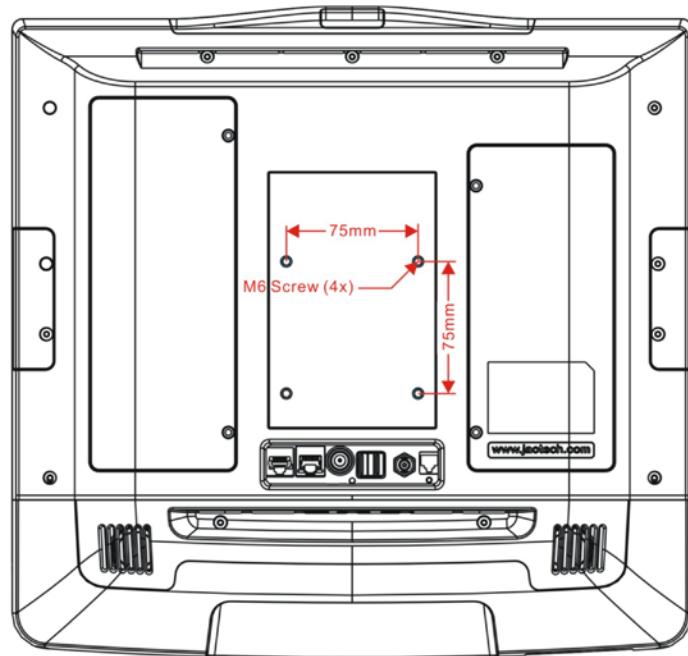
VESA mounting dimension diagram (75 x 75 mm)
